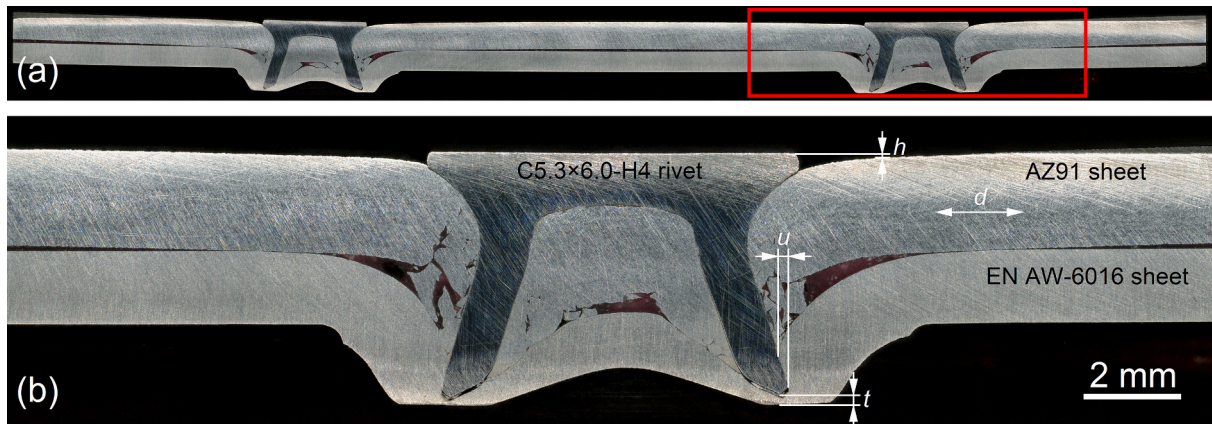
(a) Typical cross-section of a riv-bonded sample, and (b) detailed view on the cross-section of a riv-bonded joint.
